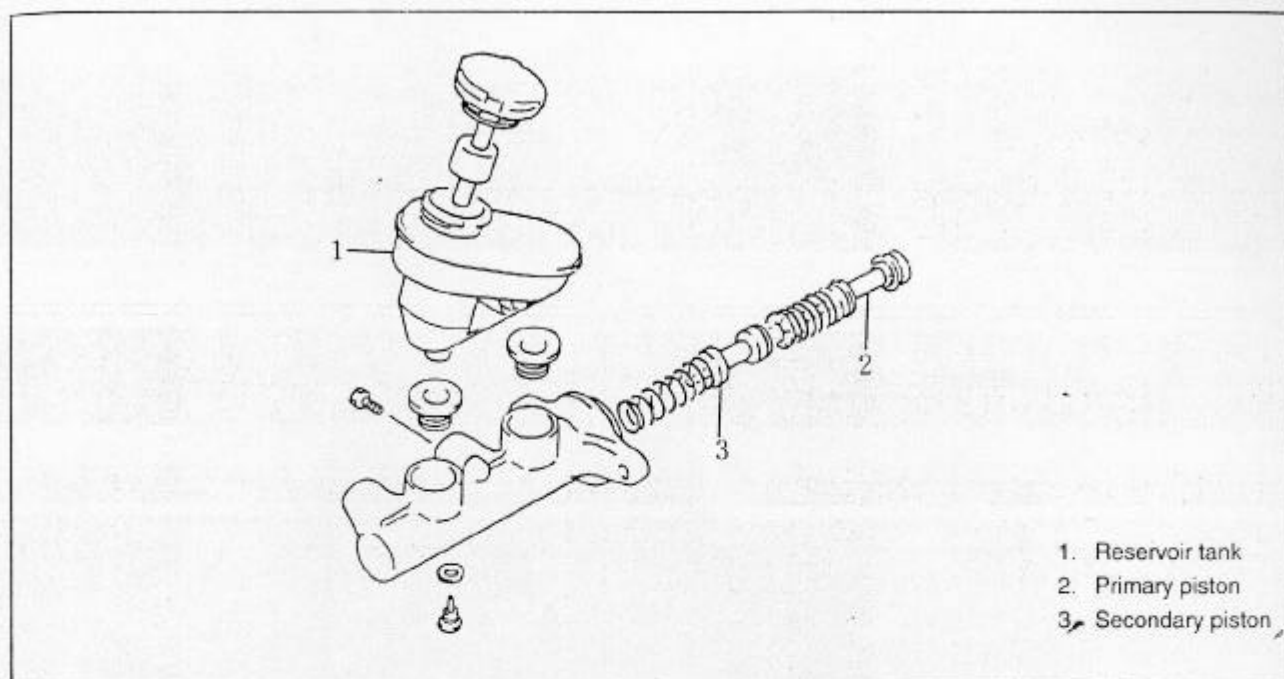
8 MASTER CYLINDER DISASSEMBLY
